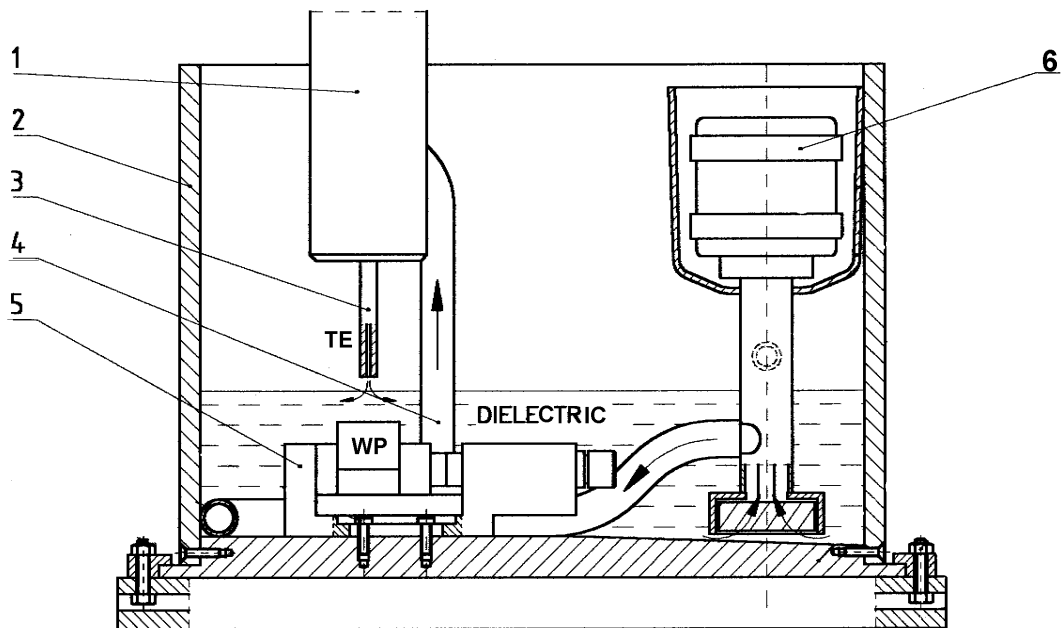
Schematic diagram of dielectric/powder supply system: 1- tool electrode holder, 2 - container, 3 - tool-electrode TE, WP-workpiece, 4 - pipe for dielectric delivering to TE, 5 - workpiece holder, 6 - pump
